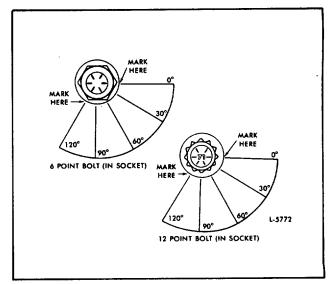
Main Bearing Cap Bolt Turn Torque Method
